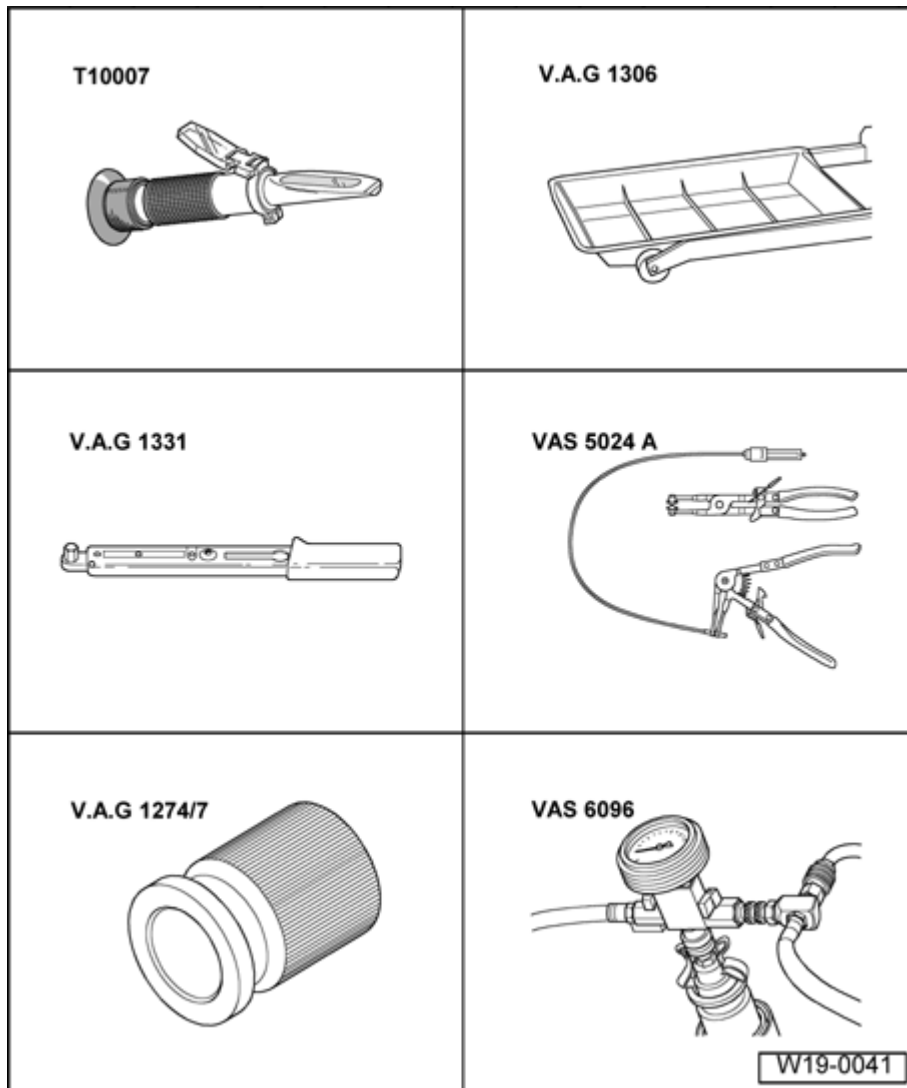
Identifying Special Tools - Cooling System, Draining And Filling
